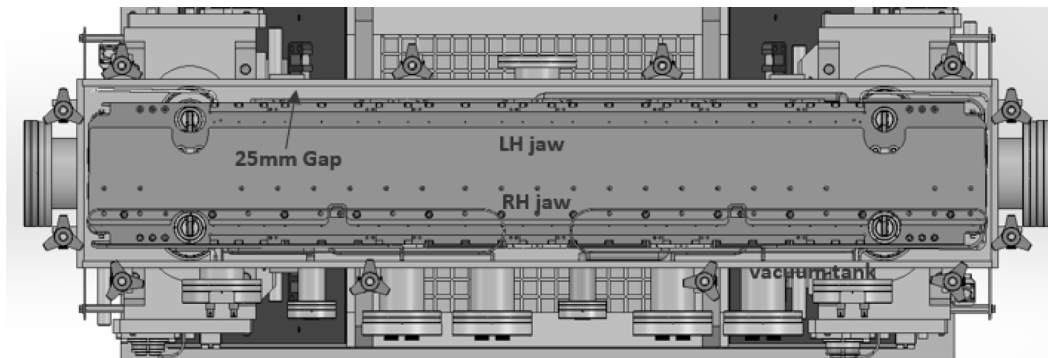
Top view cross section on the collimator showing size constraints inside the vacuum tank.
